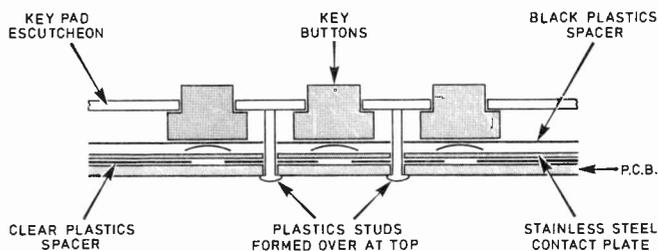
A guide to the basic construction of the Sinclair 0801 keyboard assembly
